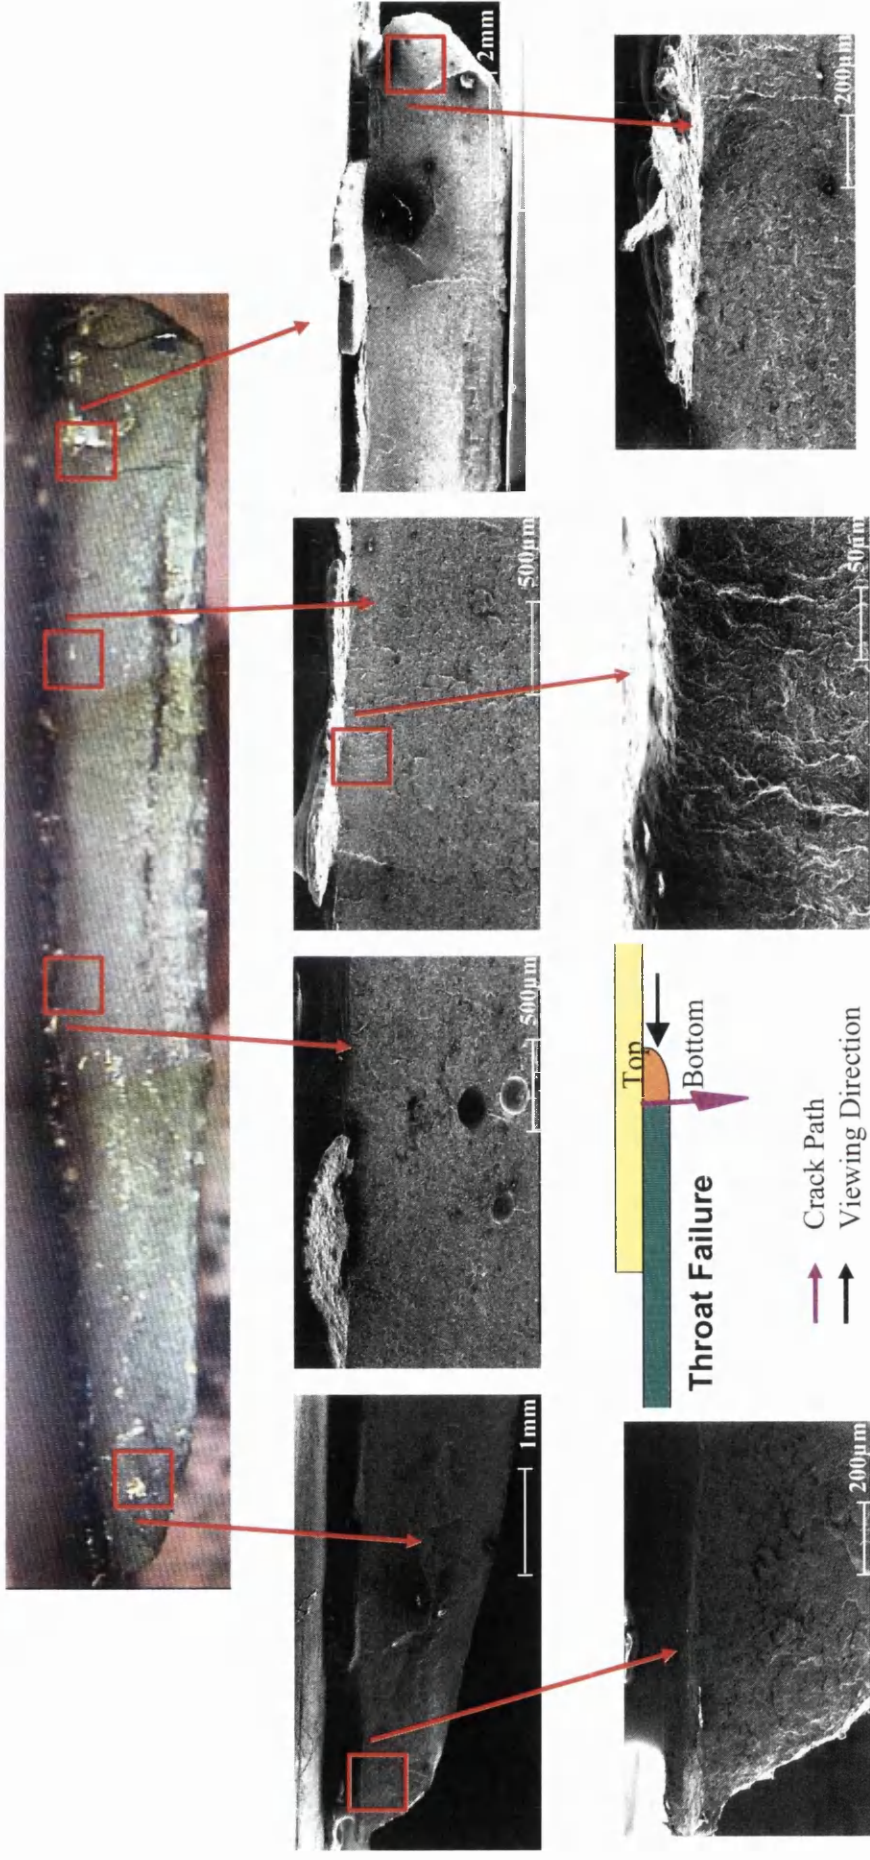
Typical Fracture Surface for GM3 Weld Throat Failure – Weld View
